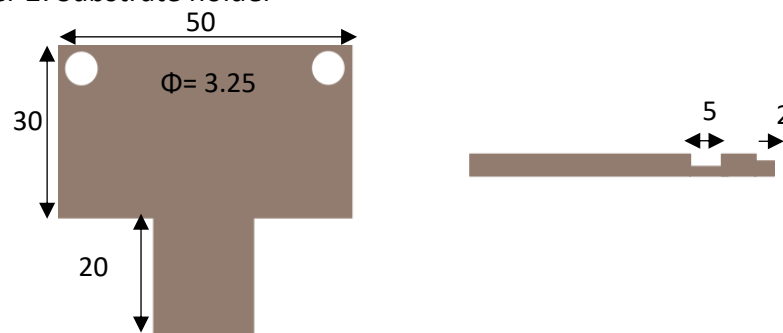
Schematic of the top (left) and side (right) view of the substrate holder with dimensions in mm.
